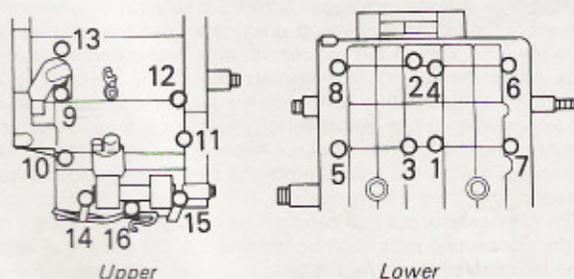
Crankcase bolt tightening sequence (see text)
